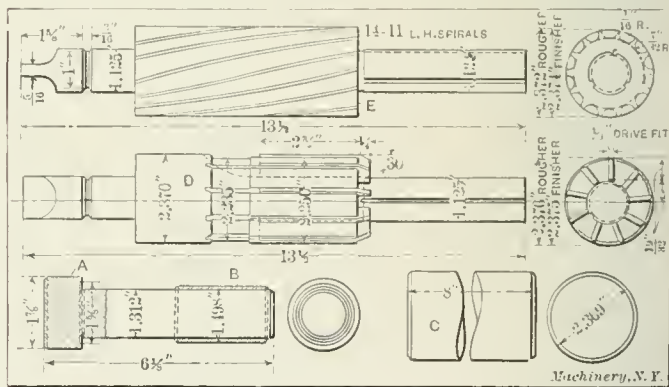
Tools for Pressing the Bushings into the Rod and Tools for Finishing the Bushings
